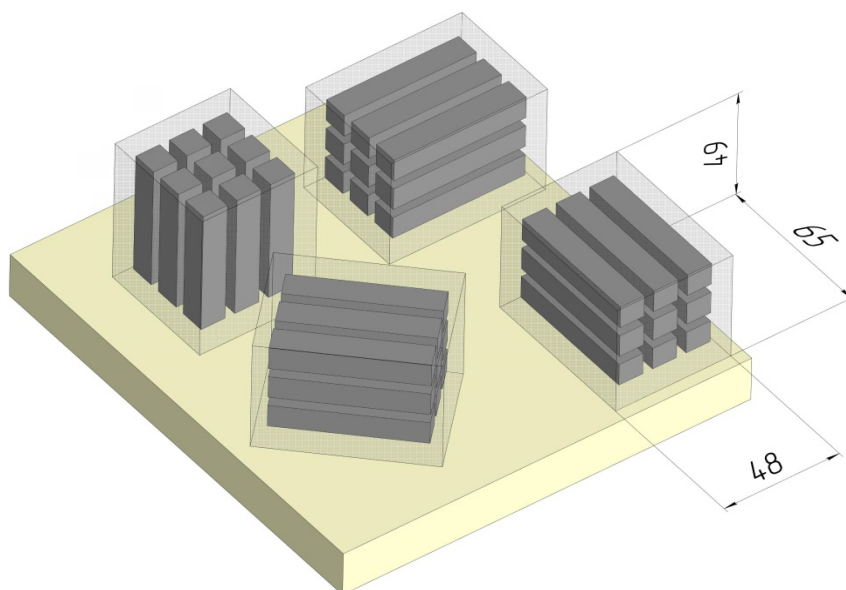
Schematic representation of synthesized sample arrangement for impact toughness testing on the substrate (welding torch direction consistent for all samples)
